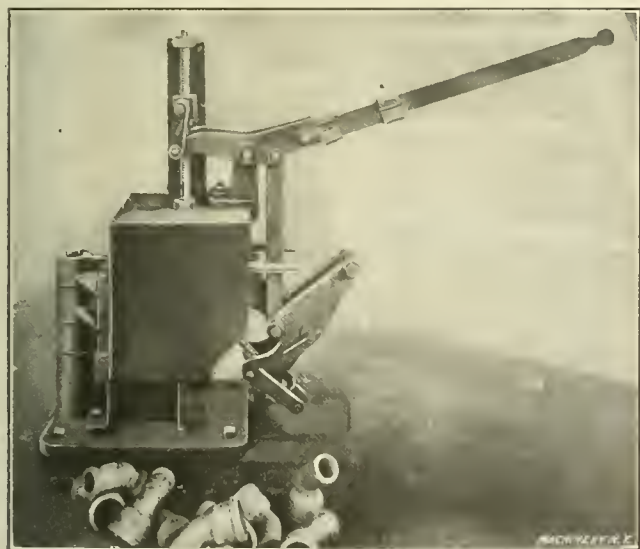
Mold for Pipe Bends—Mold closed ready to pour
